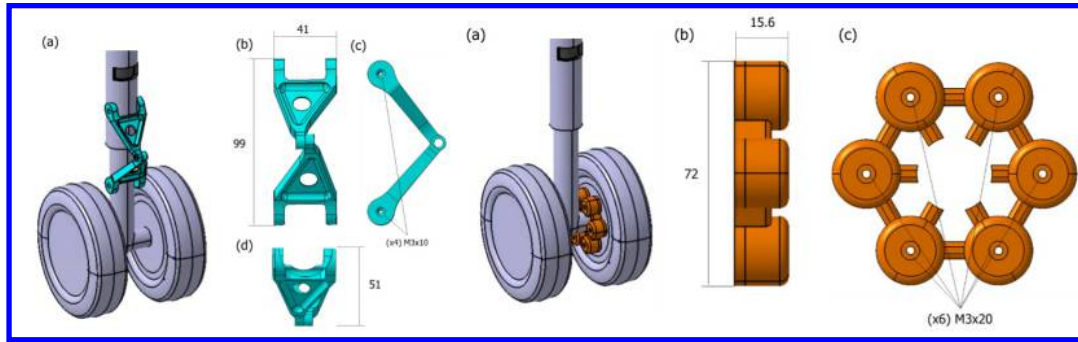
Detail of the torque link (in light blue-left) and brakes (in orange left). Distances in mm. (a) Isometric view of assembly with baseline model (b) Front view (c) Side view (d) Top view.
